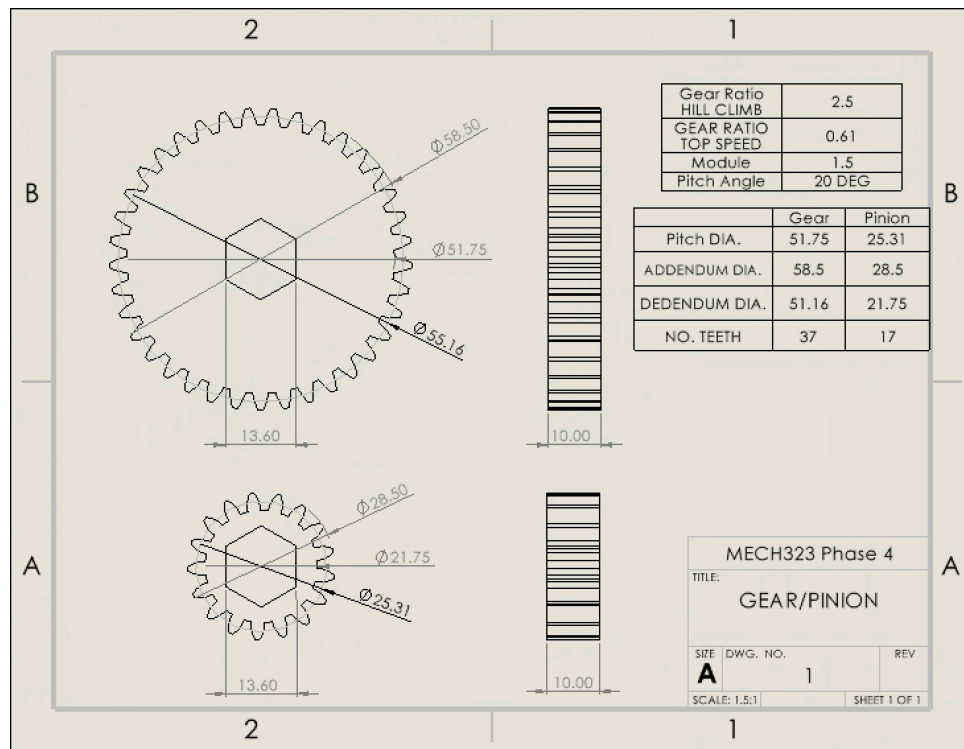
Fully dimensioned gear and pinion designs. With relevant parameters when machining the gears
